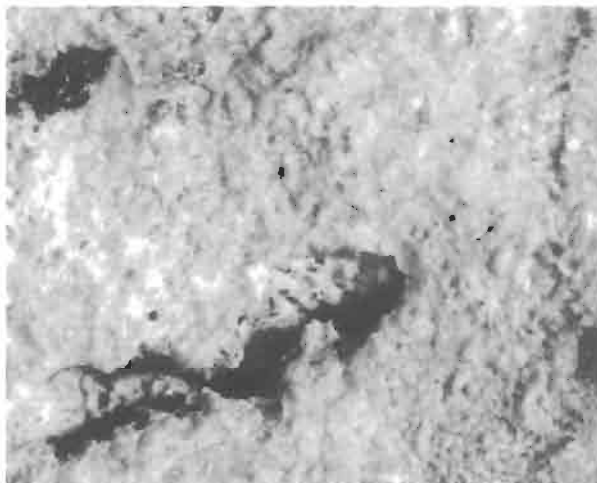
Stereomicrograph of the crack on a pipe-to-flange joint. $\times 16$
